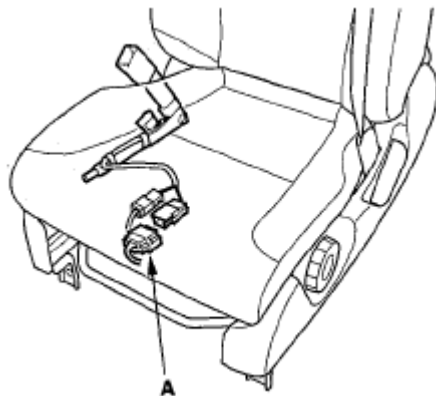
Identifying Floor Wire Harness 4P Connector (Seat Belt Buckle Tensioner)
